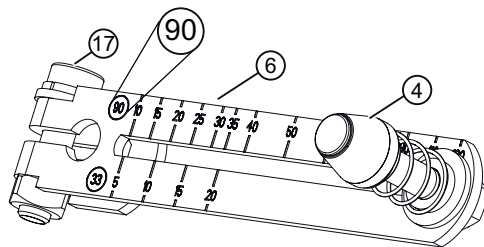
Long lever 6DR4004-8L with mounted carrier pin ④ and cylinder head screw ⑰
